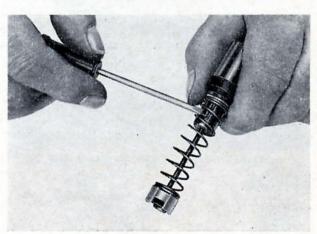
Prising the tab on the master cylinder spring retainer out of the spigot end of the plunger
